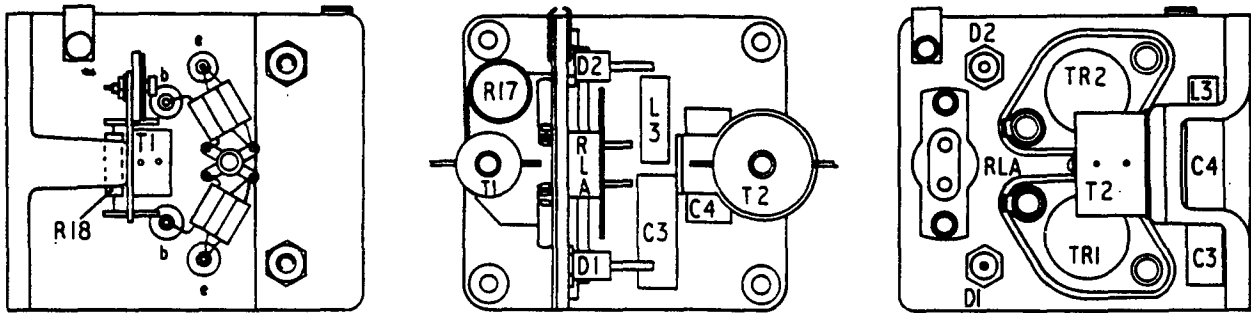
RPA12, Mk 2, front panel layout and wiring
